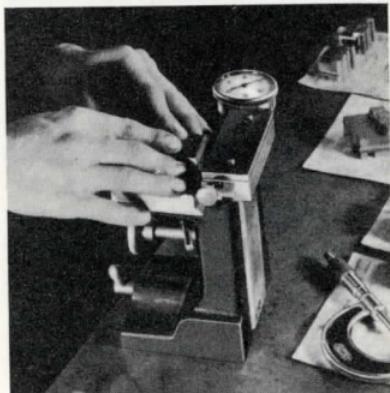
For production inspection of duplicate parts, it is standard practice to use special fixtures employing one or more Dial Indicators. This one is for gaging thread chasers.
